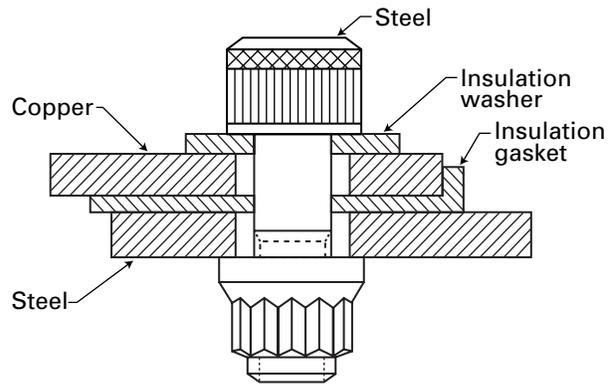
A method of electrically insulating a bolted joint to prevent galvanic corrosion.
